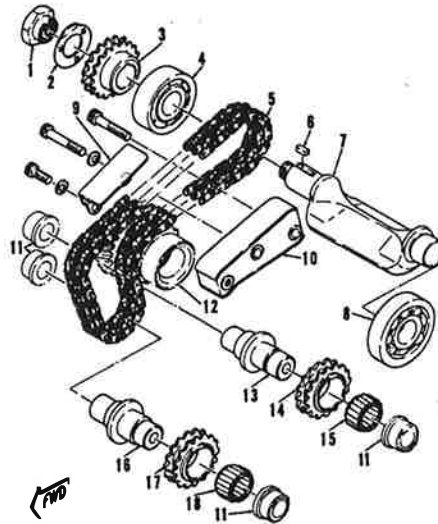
View of counterweight and drive components used on 500cc models.
